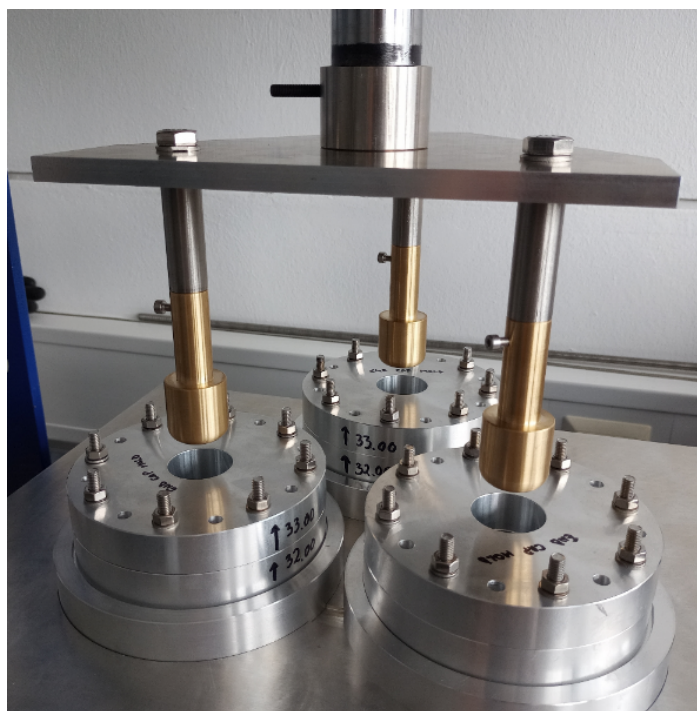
Photo of the triple-head press used for molding a batch of 3 end caps.
